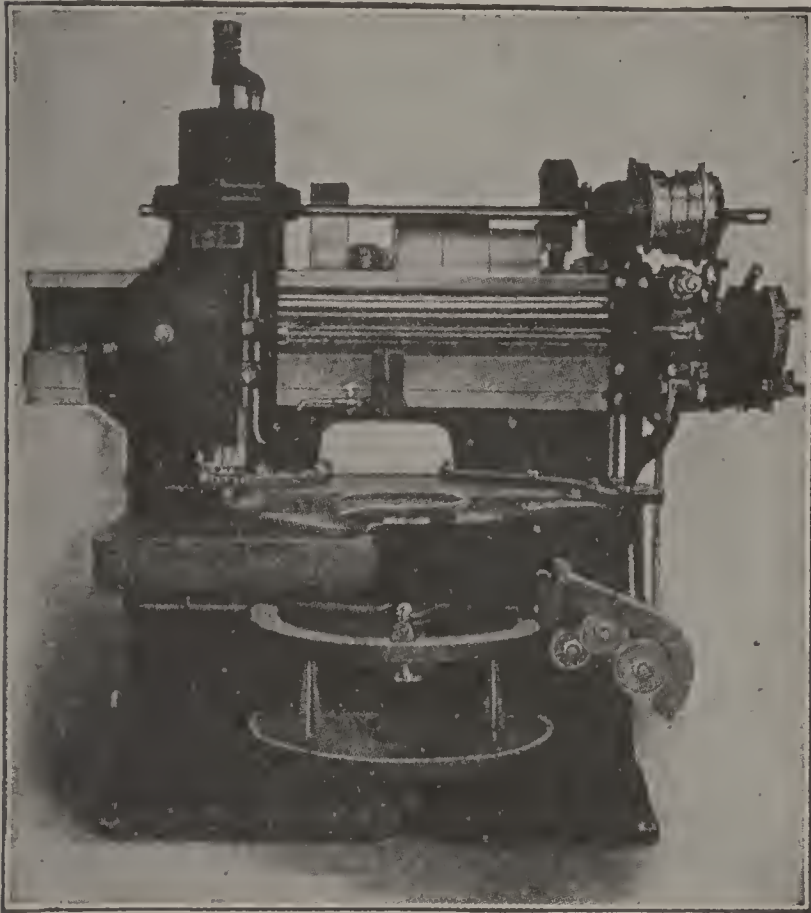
Fellows Shaper for Cutting Gear Teeth
